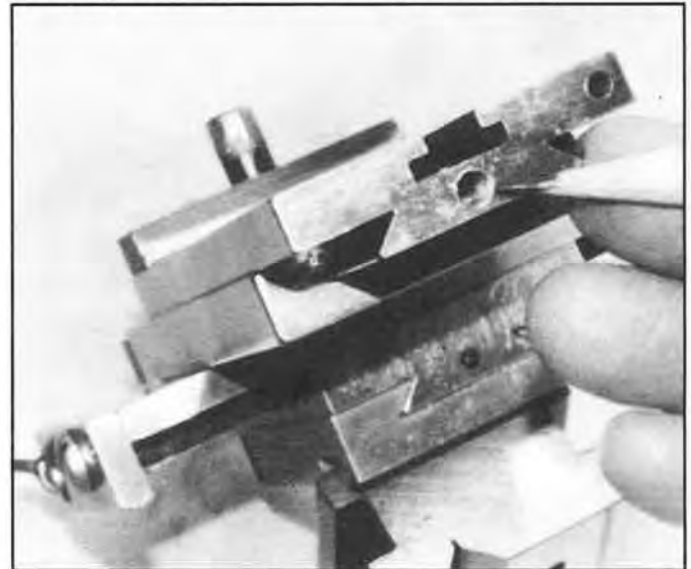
Far end of the cross-slide (bottom up). This hole threaded #8-32. The smaller hole was threaded #6-32.
